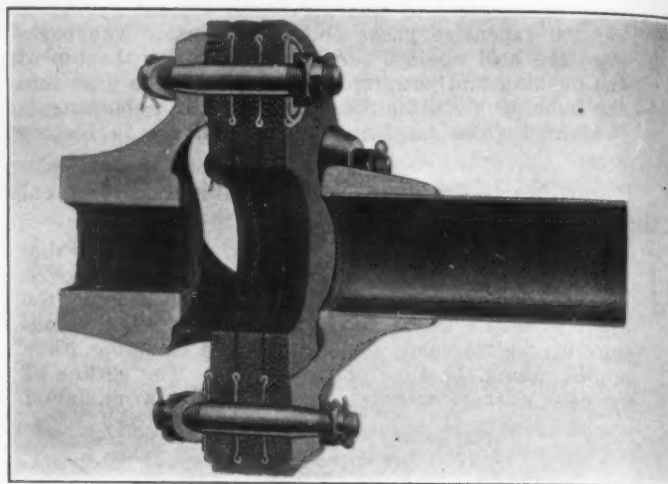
SNEAD & CO. FABRIC-DISC JOINT
